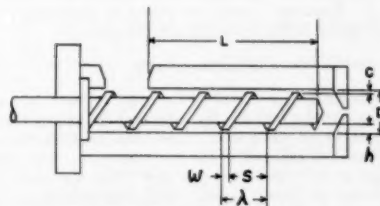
SCHEMATIC OF SCREW EXTRUDER
